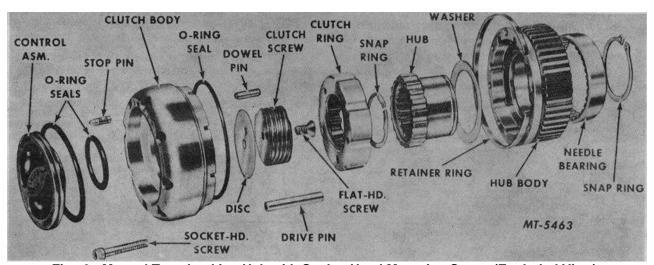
Manual Type Locking Hub with Socket Head Mounting Screw (Exploded View)
